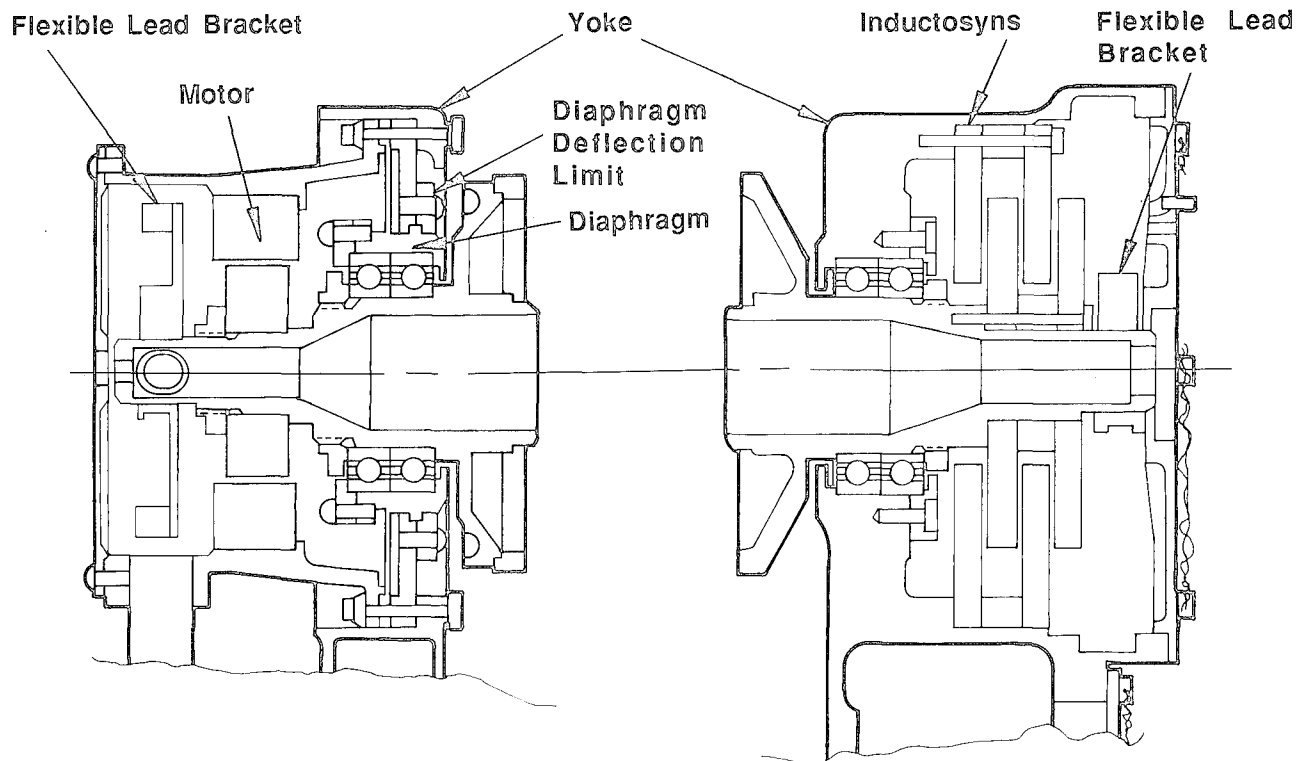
Final configuration of inner axis driveline components. Soft preloading of the duplex bearings could not be used.
